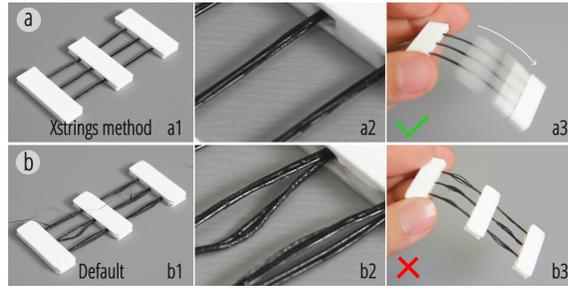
(a) The 3D printed sample with Xstrings’ G-code parameters, result in smooth motions; (b) the sample printed with default settings, which failed in motions.
